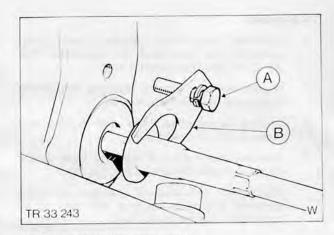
Disconnecting speedo cable A – Securing bolt B – Clamp
